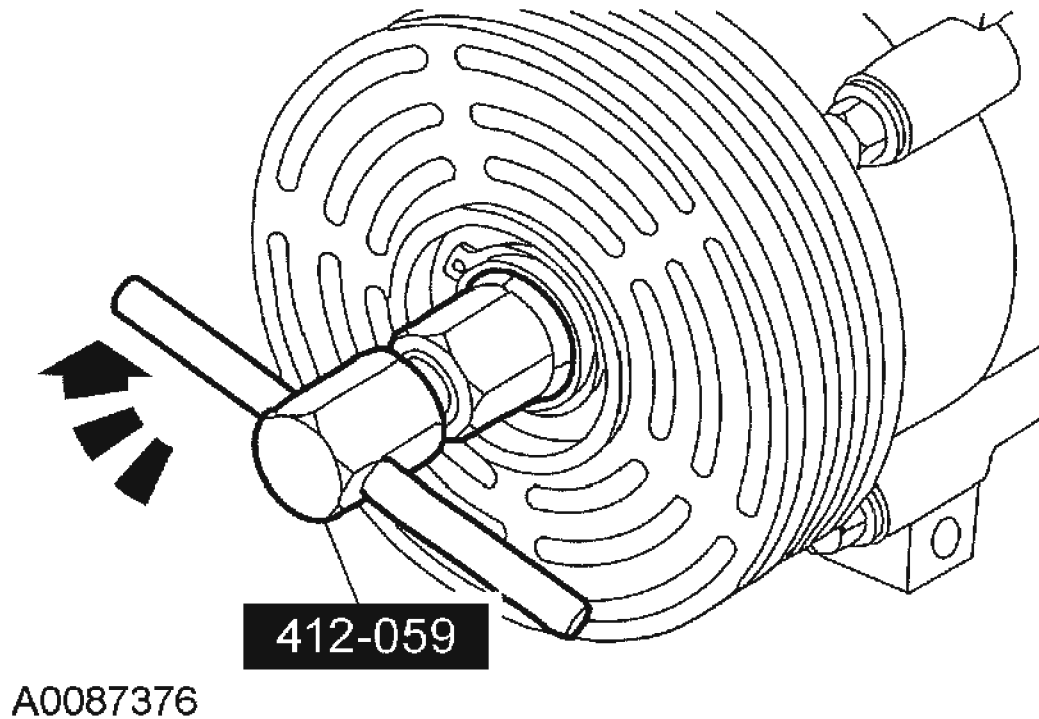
Turning Tool Handle Clockwise To Expand Tool Tip Inside Of Shaft Seal
